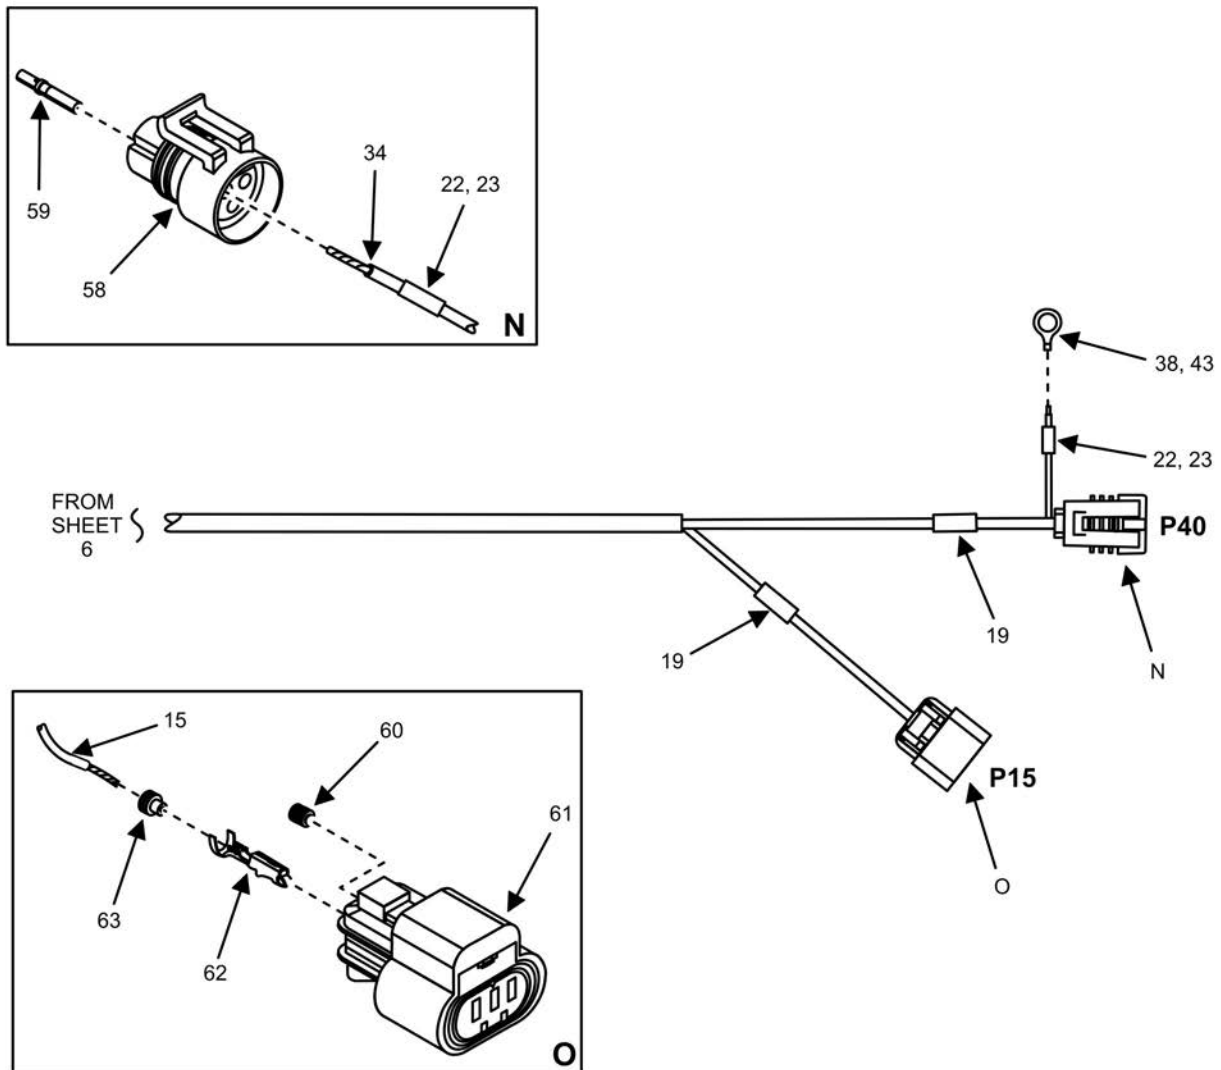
Engine Wiring Harness (Sheet 6 of 19).
